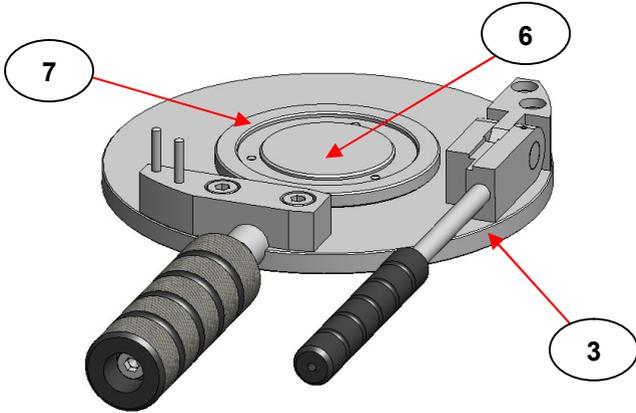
Spacer Ring Fitted to Lower Platen Pressing Assembly
